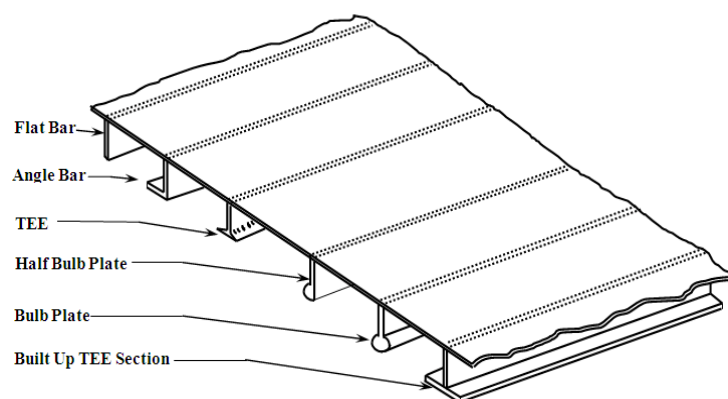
Commonly used Open Section Stiffeners in Ship Building
